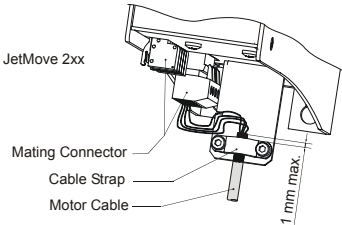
View on the SC series mating connector of the motor (internal thread M23)
